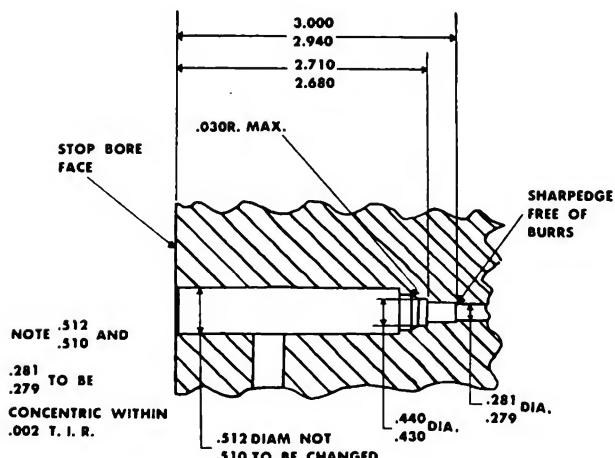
Reworking dimensions to change pumps to latest automatic stop
